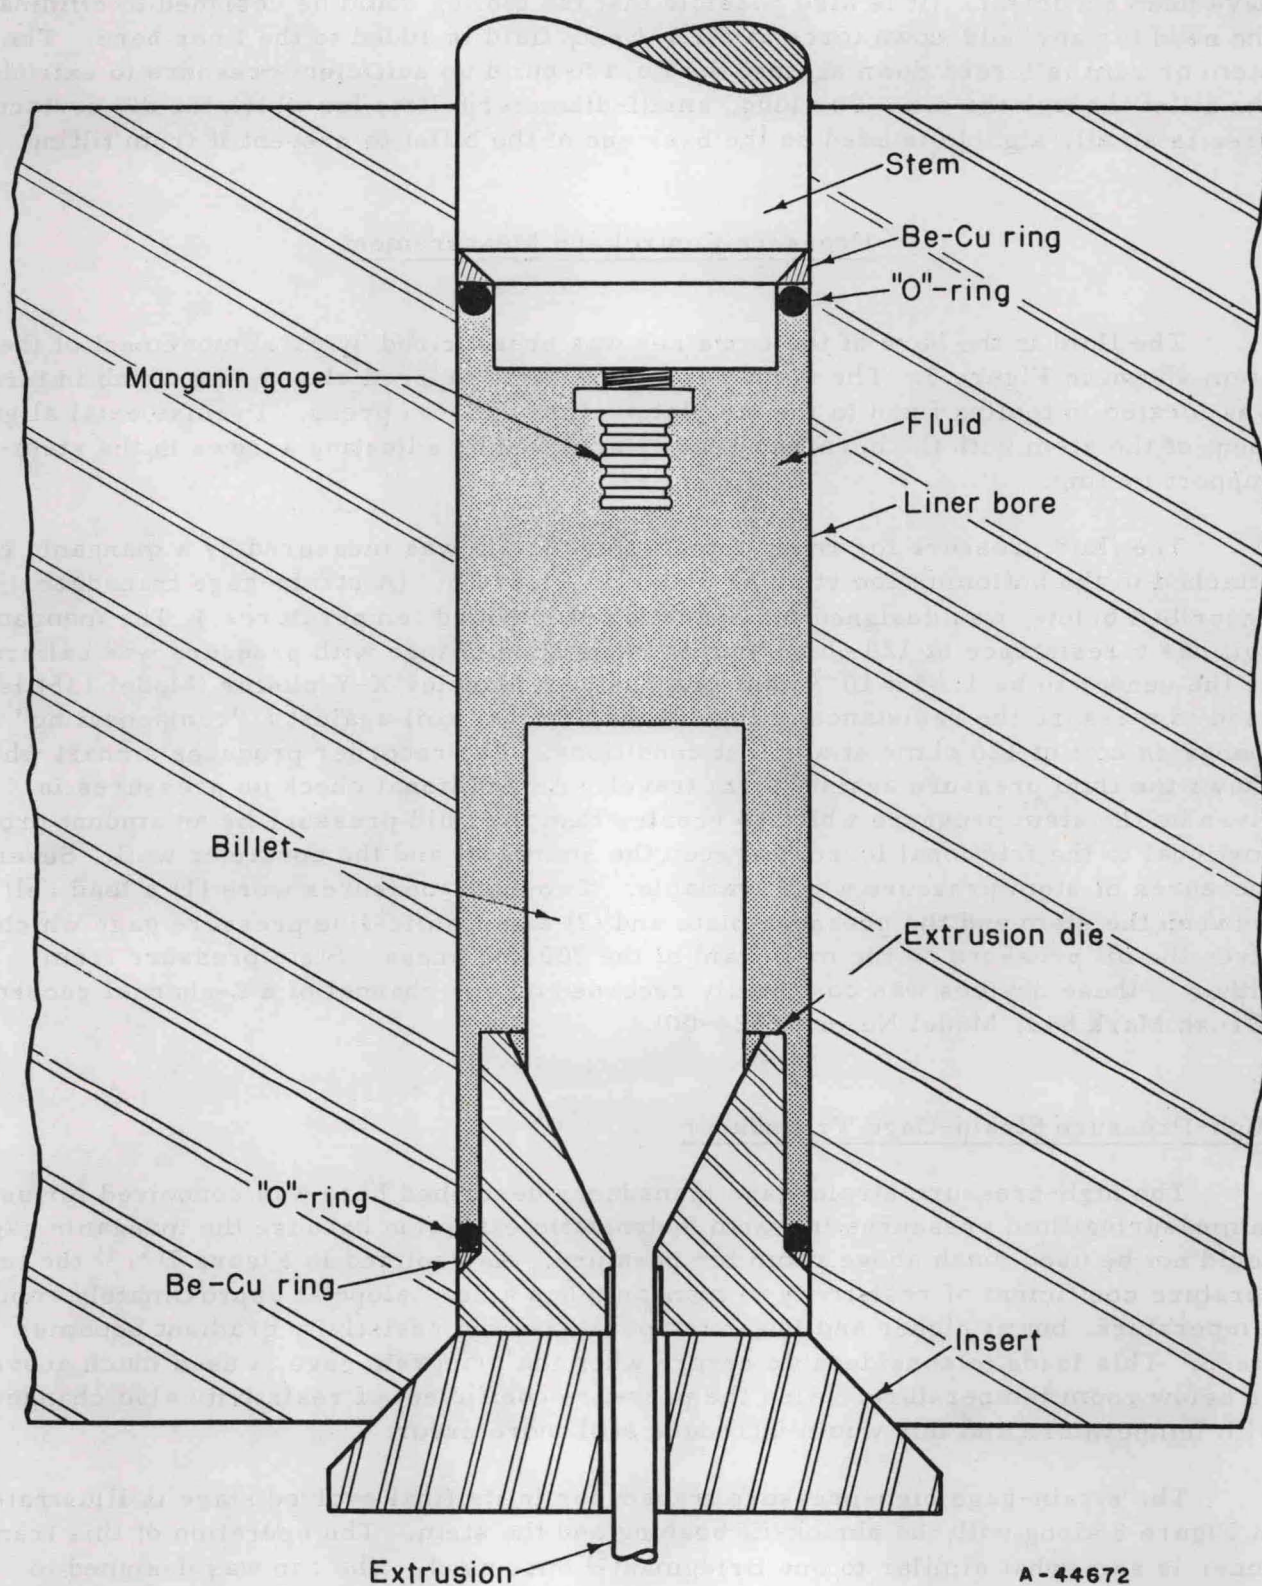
DETAILS OF HYDROSTATIC EXTRUSION PROCESS SHOWING THE STEM AND DIE SEAL METHODS, AND PARTIALLY EXTRUDED BILLET
